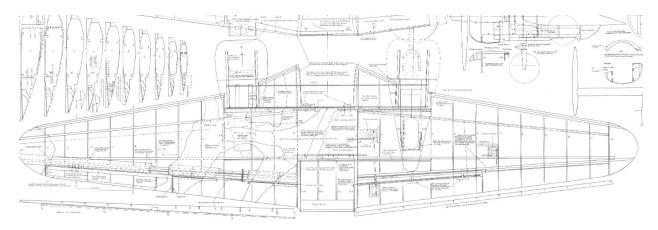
Drawing C45 AT-11 JRB-1 Wing View Top View
